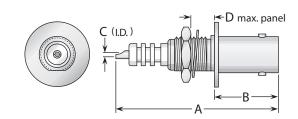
(Bulkhead jack receptacle, front mount, no mounting gasket)
